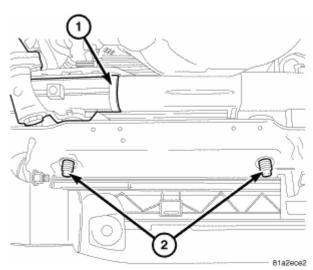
Identifying Power Steering Lines & Gear Courtesy of CHRYSLER LLC
